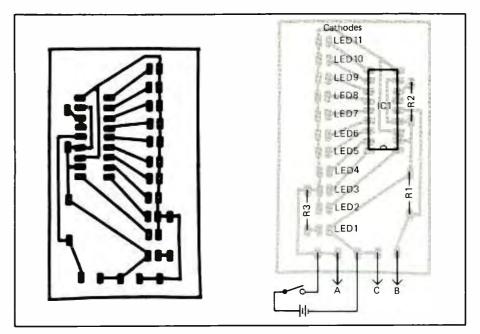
Actual-size etching-and-drilling guide is at left; components-placement diagram at right gives complete board assembly details.
